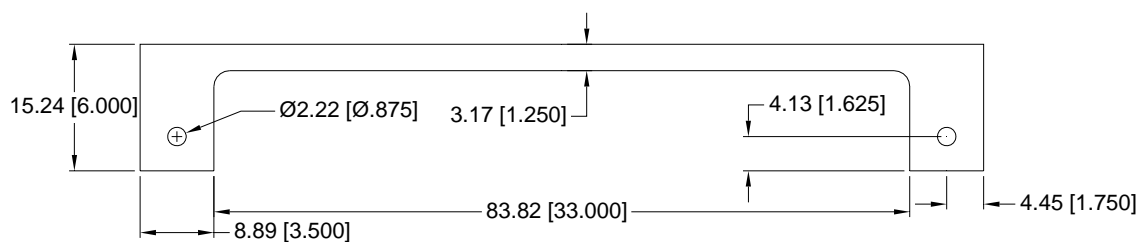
C-shape dimensions for *Test B*, $t = 12.7 \text{ mm}$ (0.5 in.). Units in mm (in.).
